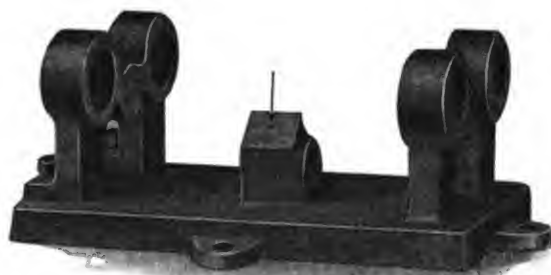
THIS IS THE BASE UPON WHICH THE GEARS RUN. THE ARROW POINTS TO THE STEAM PORT
